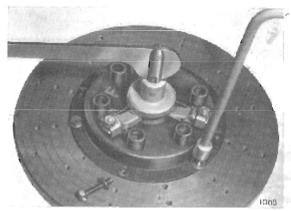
Attaching clutch unit to Churchill fixture (Herald and Spitfire),
